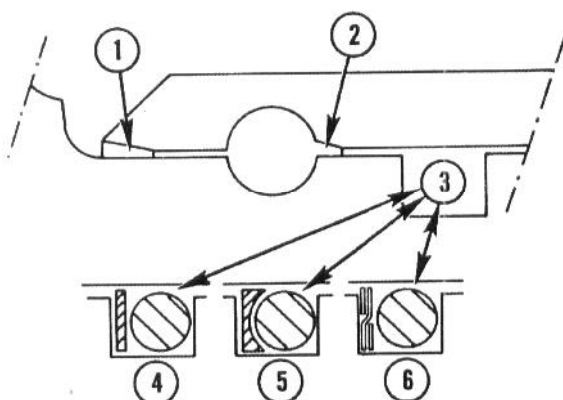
Installation of Static Seals and Back-Up Washers in OD Groove of Bearing
